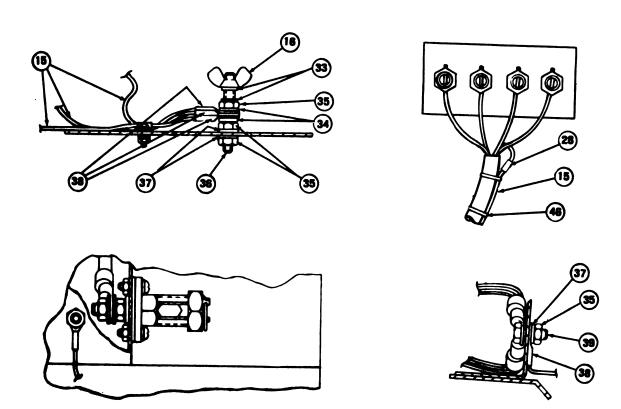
Accessory Mounting and Grounding Stud (Sheet 3 of 3)
